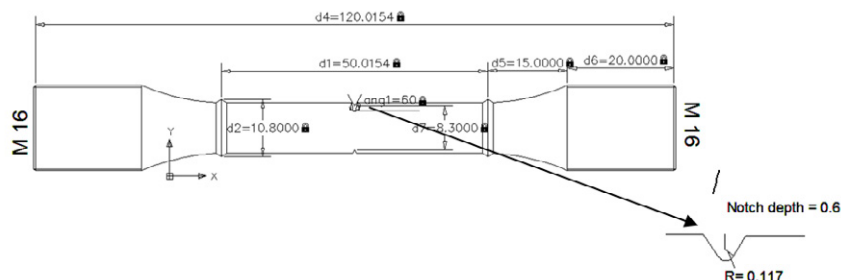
Dimensions of the test sample (All dimensions are in mm).
